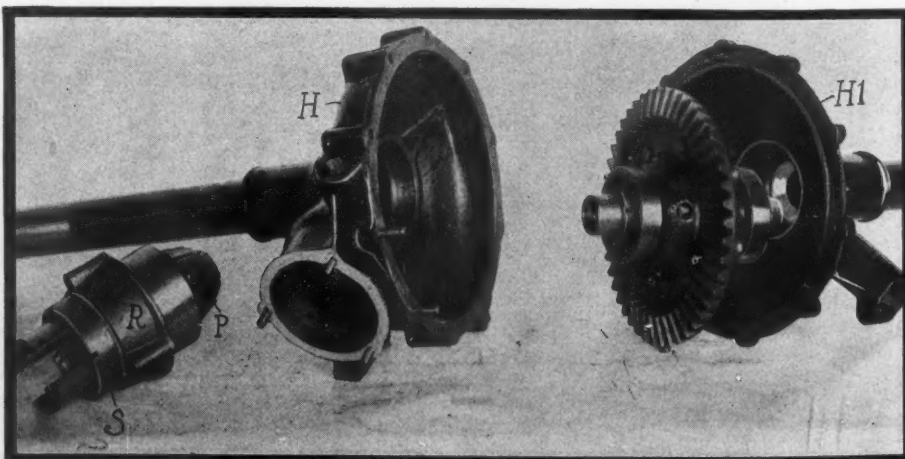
PINION REMOVED AND AXLE PARTED IN LOCOMOBILE CHASSIS
